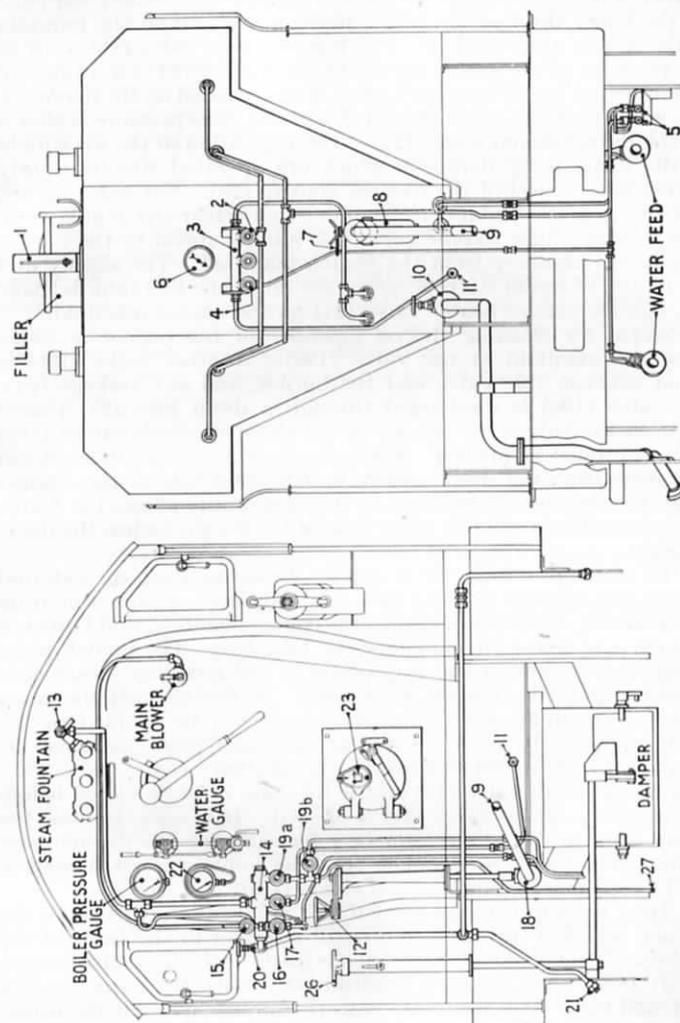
B.—FITTINGS ON CAB AND TENDER OF OIL-BURNING LOCOMOTIVE, G.W.R.
